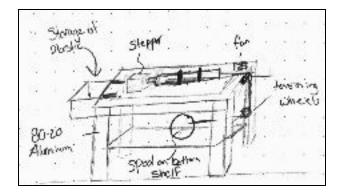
Concept sketch using stepper motor and 2 pulleys for spooling
